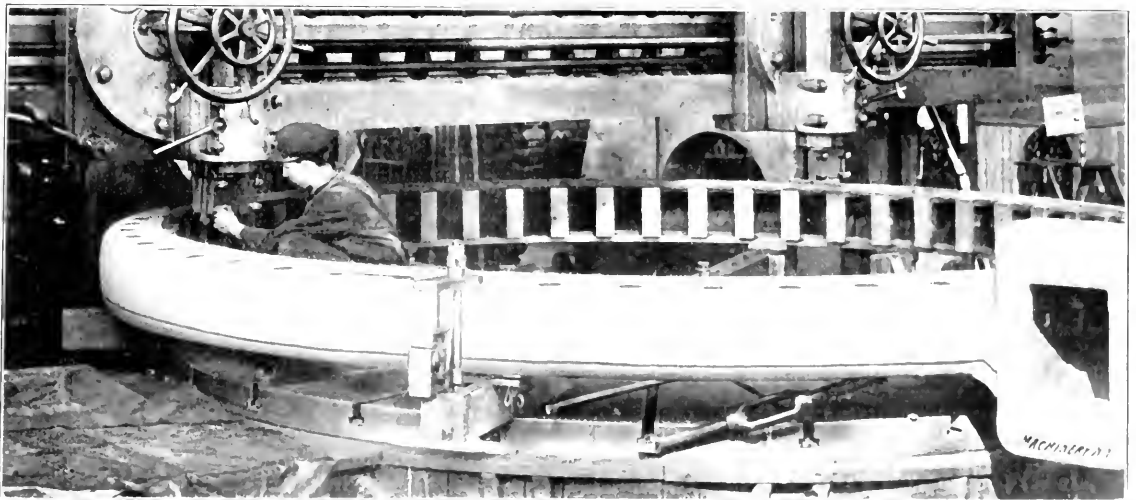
Generator Frame on Boring Mill Table, showing Method of Holding Work
